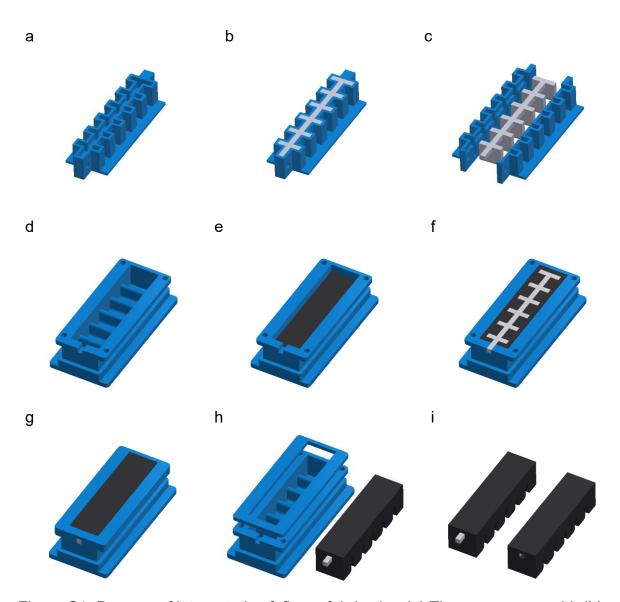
Process of integrated soft finger fabrication (a) The wax core mould. (b) Pouring the melted liquid wax into the mould, cooling and consolidating. (c) Unmoulding the wax core. (d) Assembly of the cavity mould. (e) Pouring prepared composite to the cavity mould. (f) Placing the wax core into the mould. (g) Adding the top mould on. (h) After curing at  $45^{\circ}$ C for 1 hour, unmoulding the integrated finger and trimming the edge. (i) Removing the wax core.
